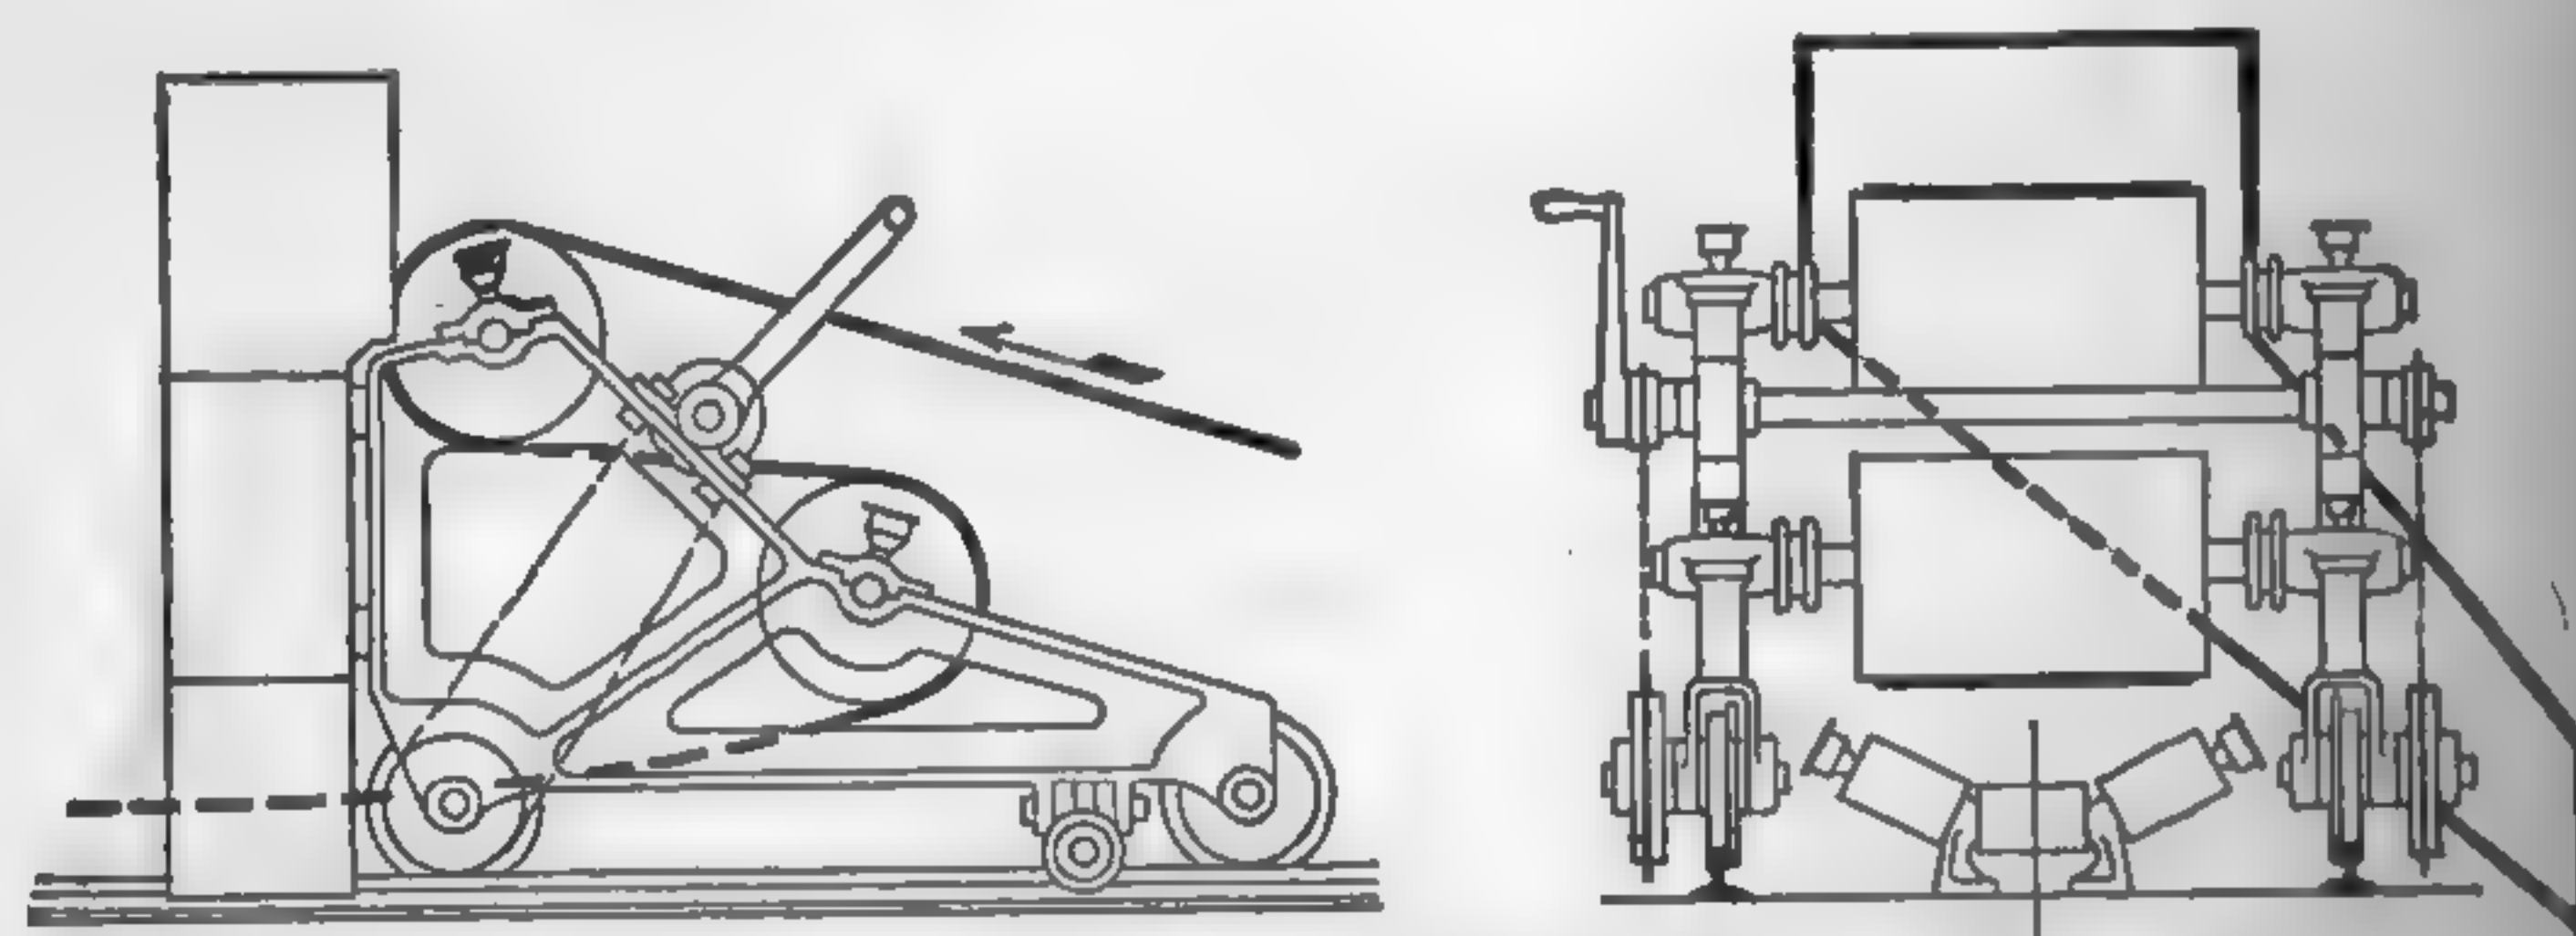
Hand-propelled Tripper for Belt Conveyor.
